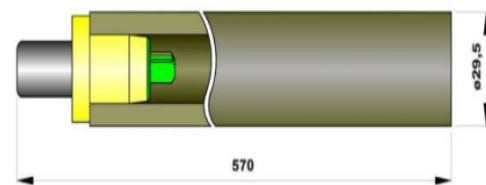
shows a cut-away view of a standard Positherm immersion thermocouple.
